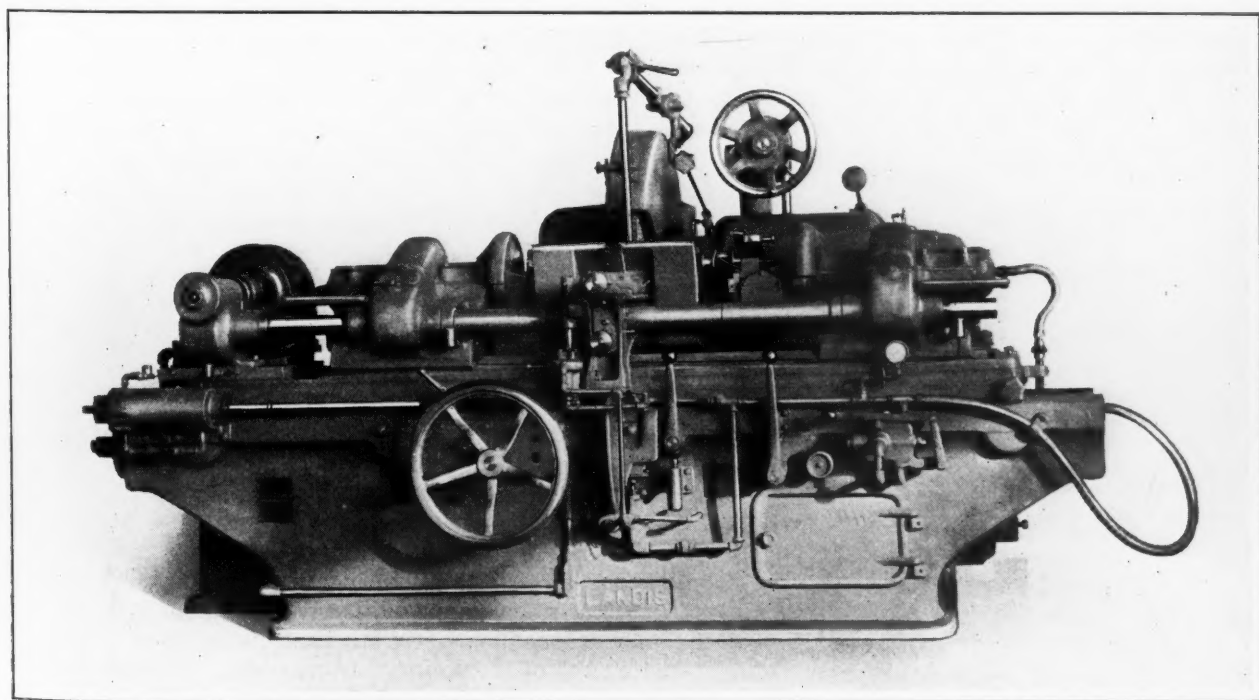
Landis Hydraulic Machine which Grinds All the Pins of a Crankshaft in One Operation
